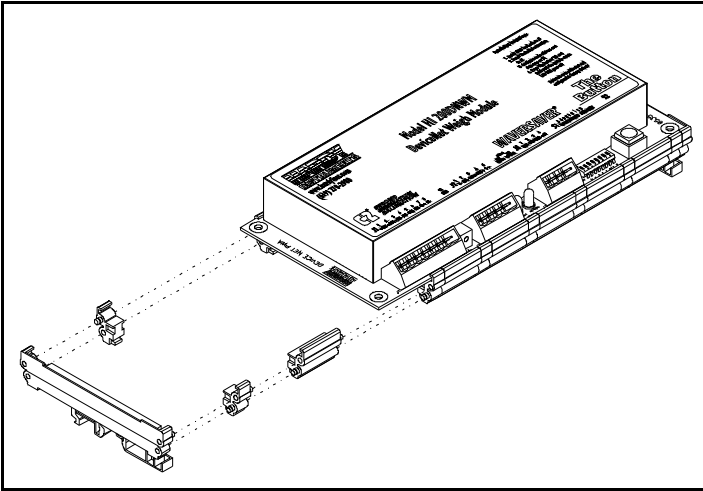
INSTALLING THE WEIGH MODULE INTO THE ASSEMBLED DIN RAIL
